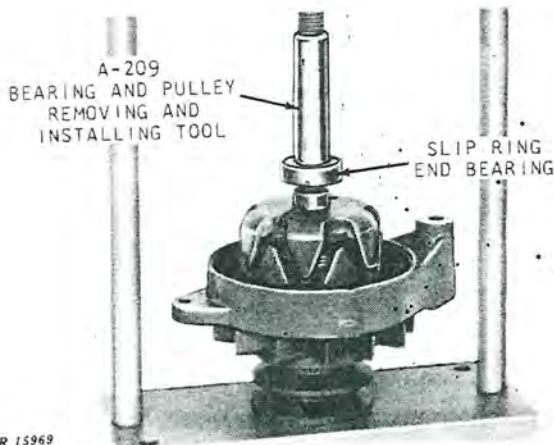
Installing Slip Ring End Bearing (MR Series)
